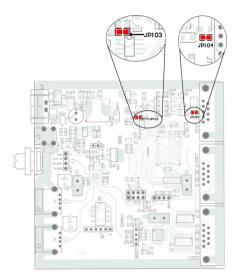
Positions of the solder fields JP103 and JP104 on the PCB of the PCAN-USB Hub
